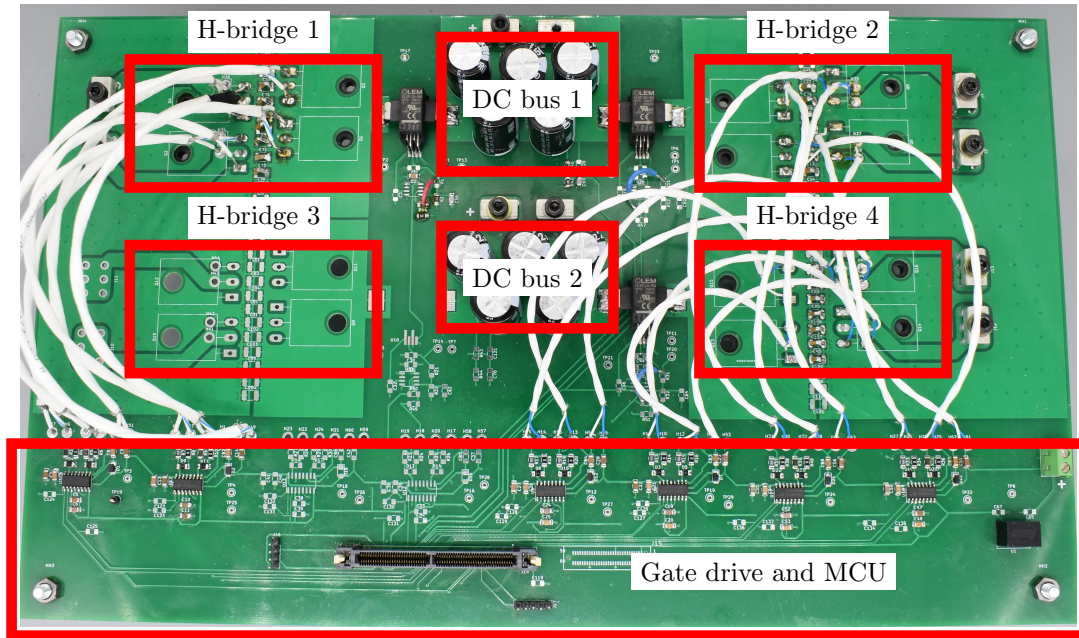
Drive PCB. H-bridge 3 is not populated. The power device transistor tabs are located underneath the board. The logic and gate drive are located at the bottom of the board.
